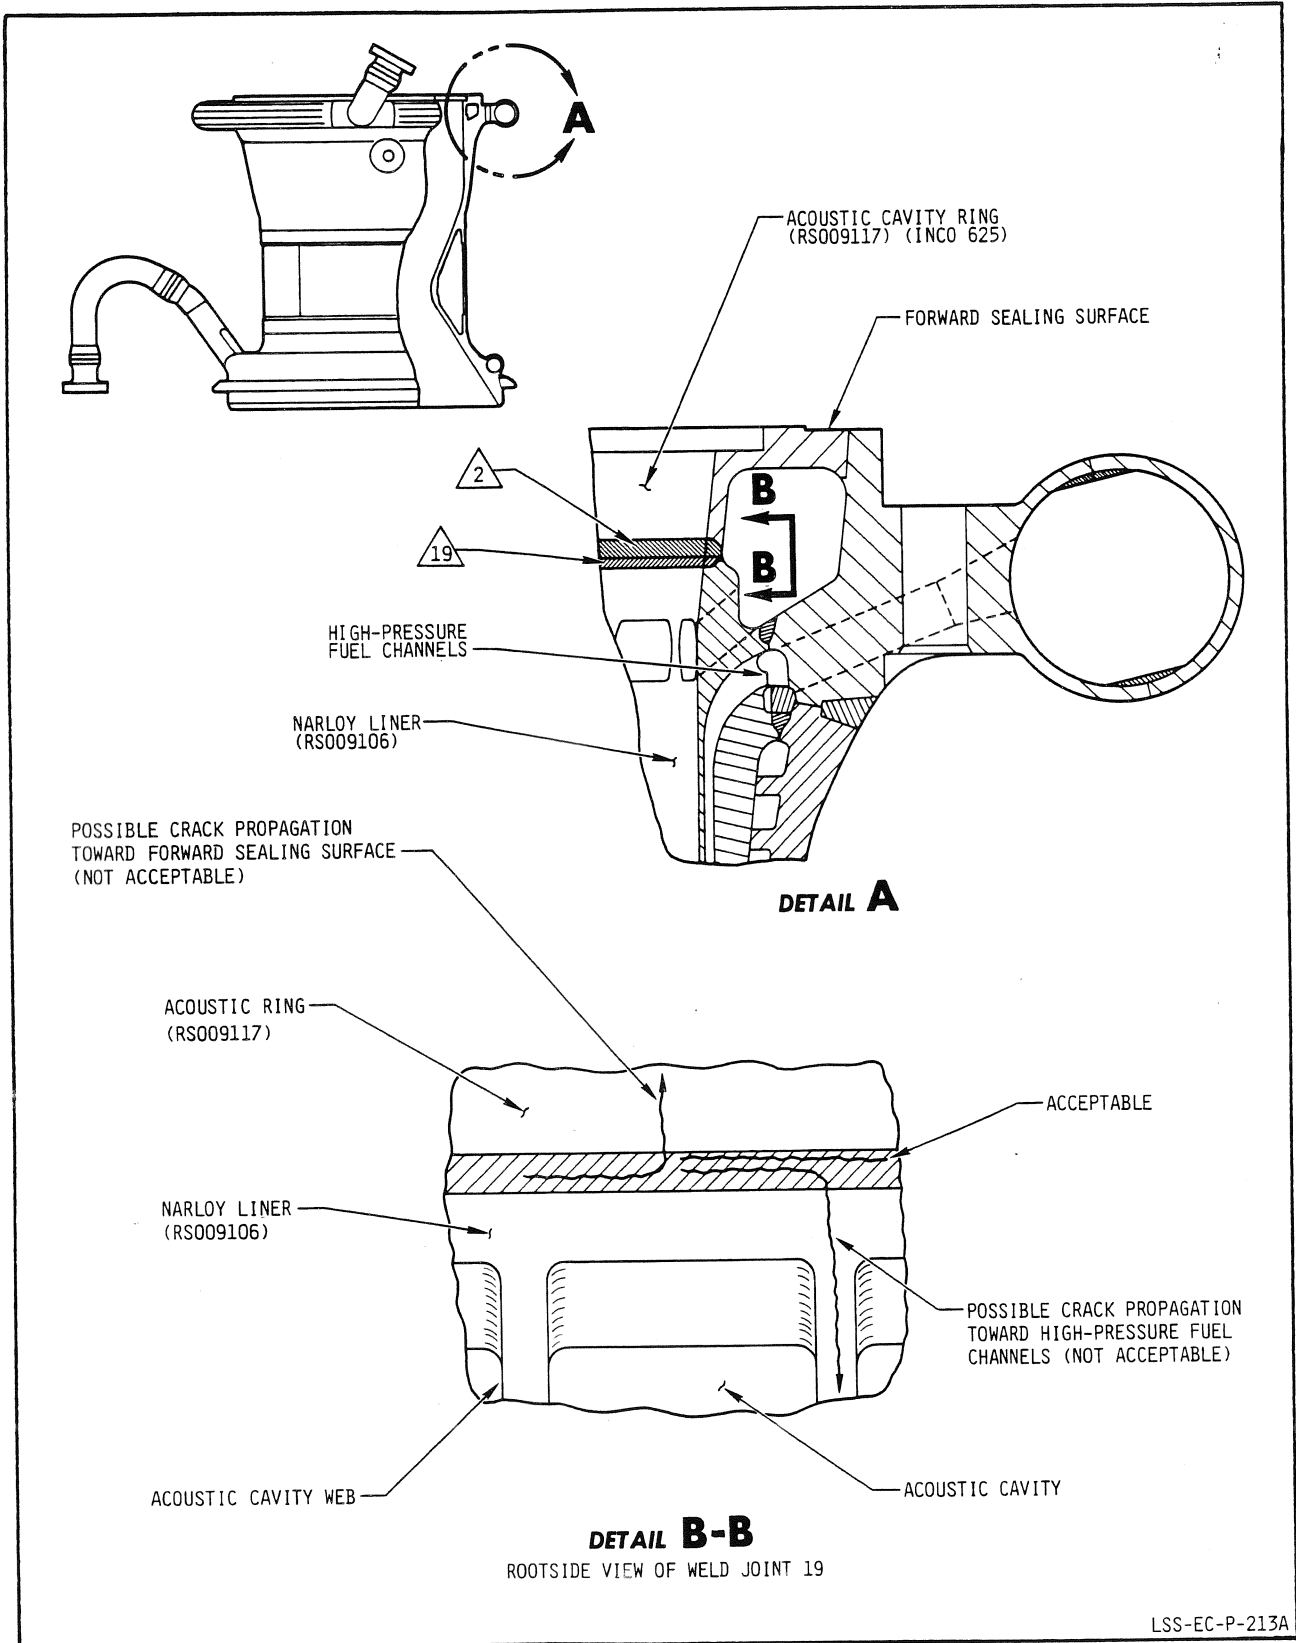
Location of Weld Joints 2 and 19
